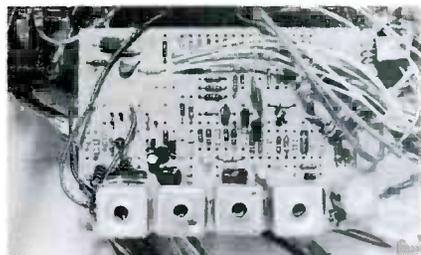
The four shielded coils show this main remote chassis is part of the 600Z system.
